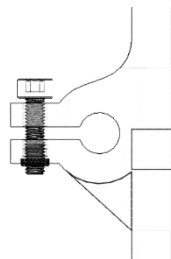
Wire Frame View of Heat Set Insert Clamping Mechanism
